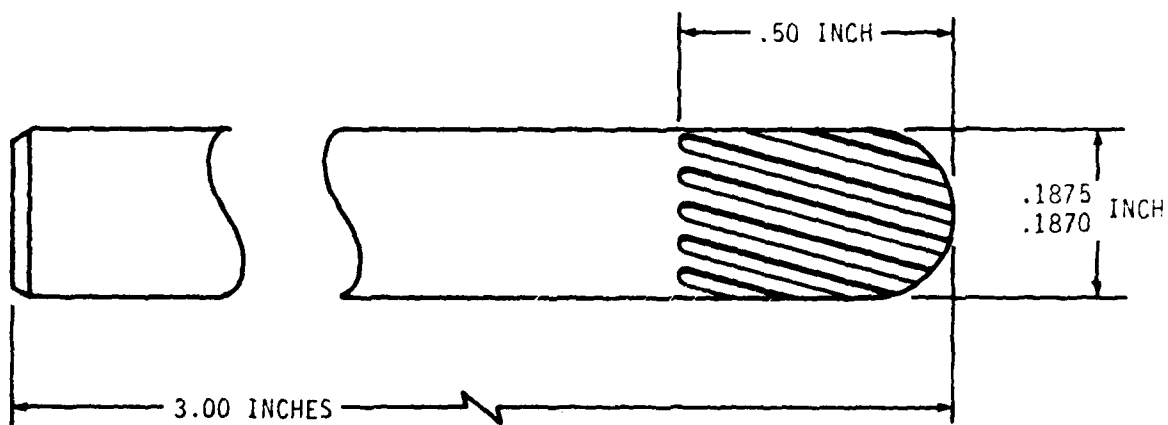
Typical Impeller Airfoil and Hub Finish Contour Milling Cutter Requirements.
